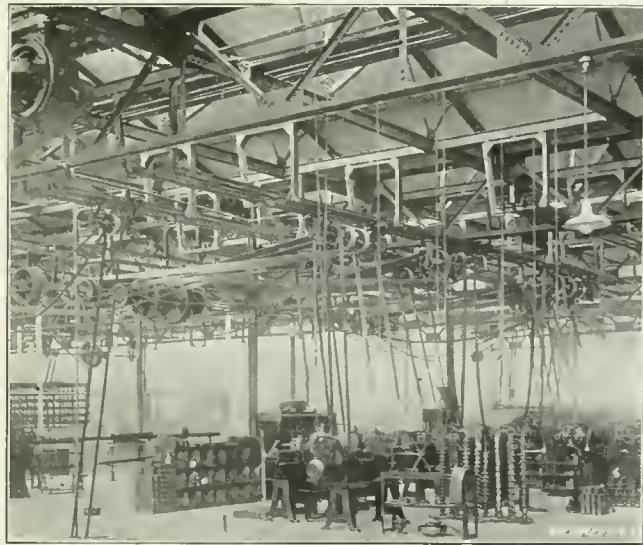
Turret Lathe Department, showing Motor Group Drive
